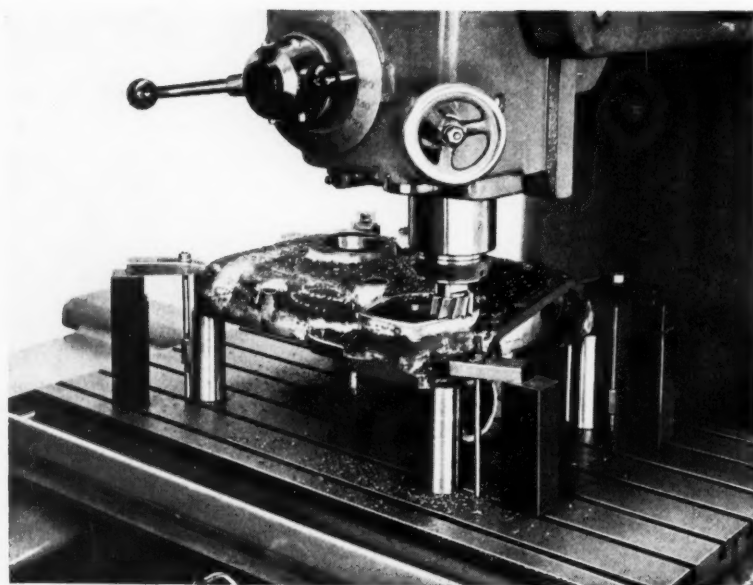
(Center) Using a Jig-boring Machine for Manufacturing Work. A Milling Operation Performed on the Same Piece is Shown in Fig. 7
